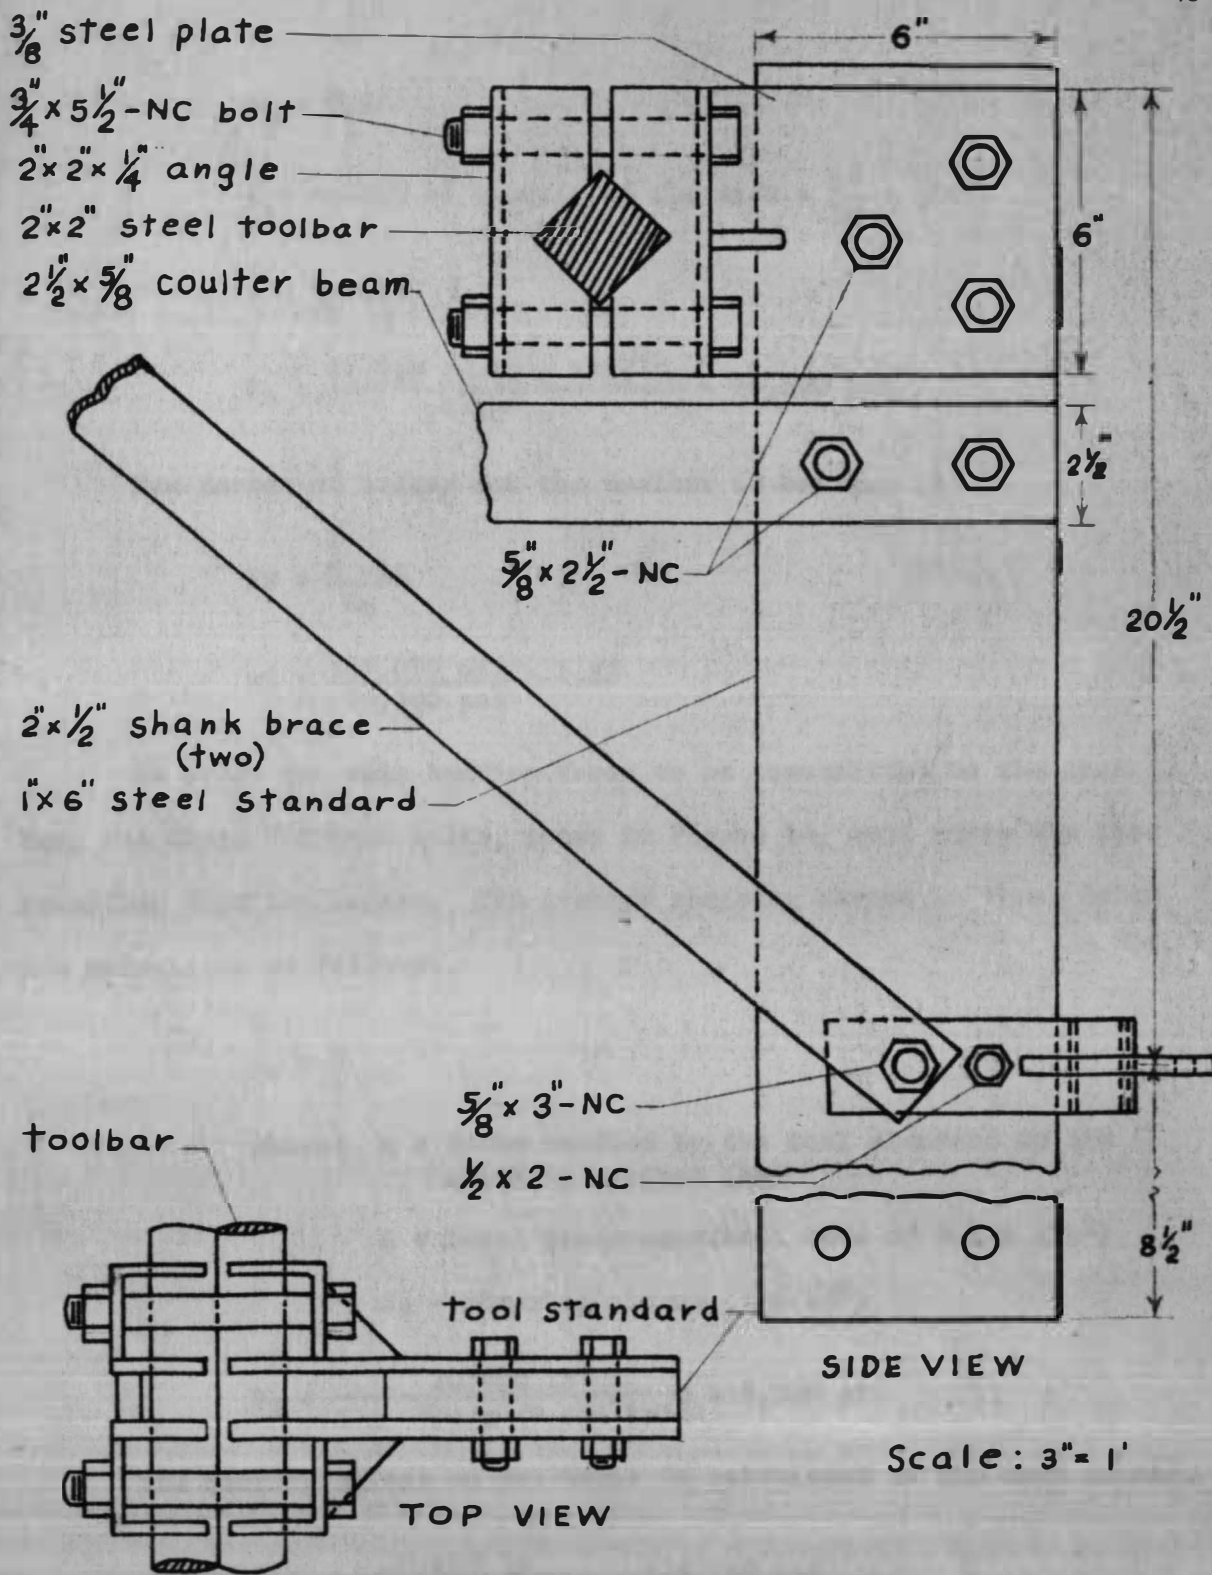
Tool Standard, Toolbar Mounting Bracket and Tool Standard Brace
